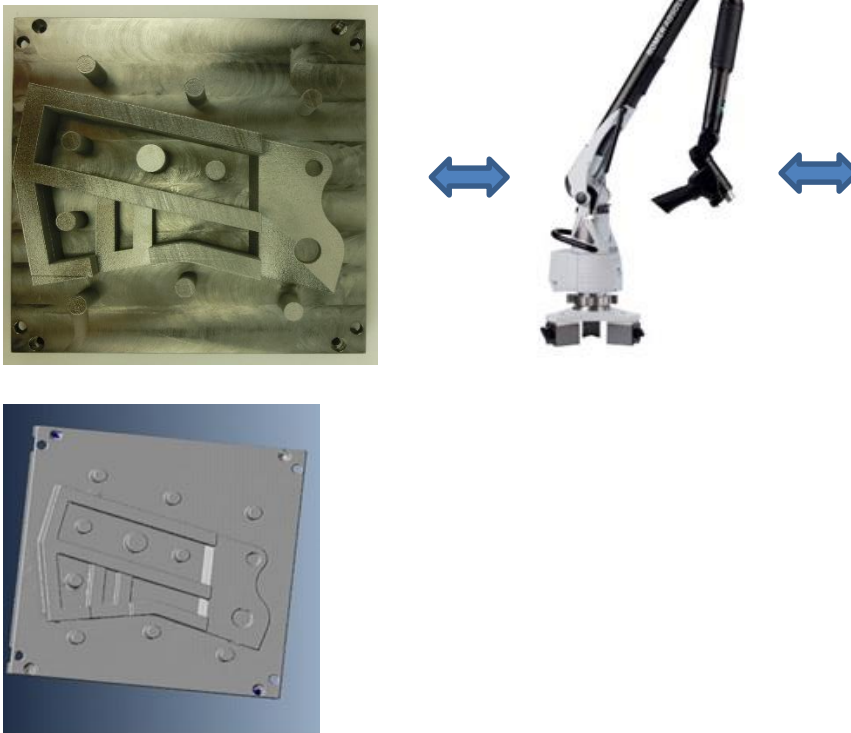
Schematic illustration explaining how the test part can be transferred to a scanned CAD file by using 3D scanner
